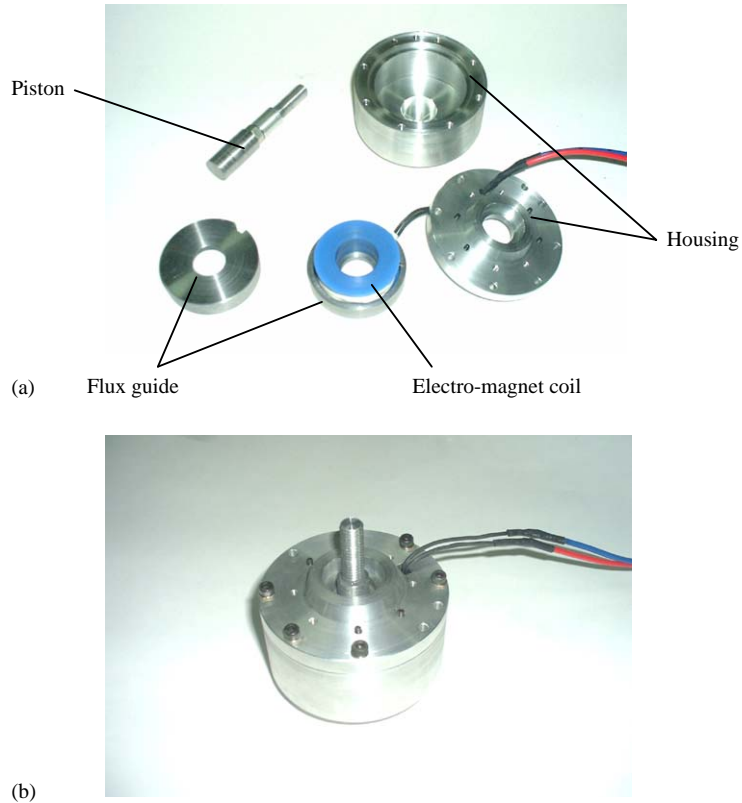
Photograph of the MR damper; (a) components, (b) assembly.
